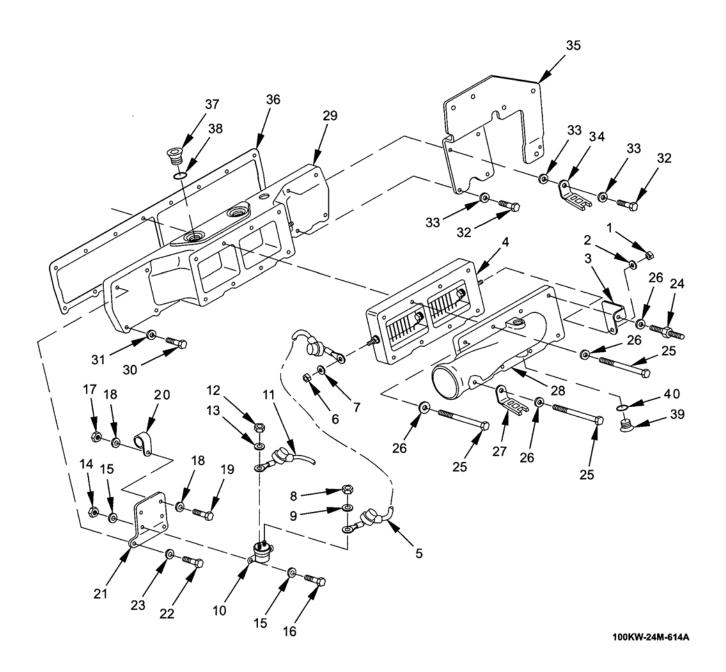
Air Inlet Elbow, Heater, and Manifold Cover.
